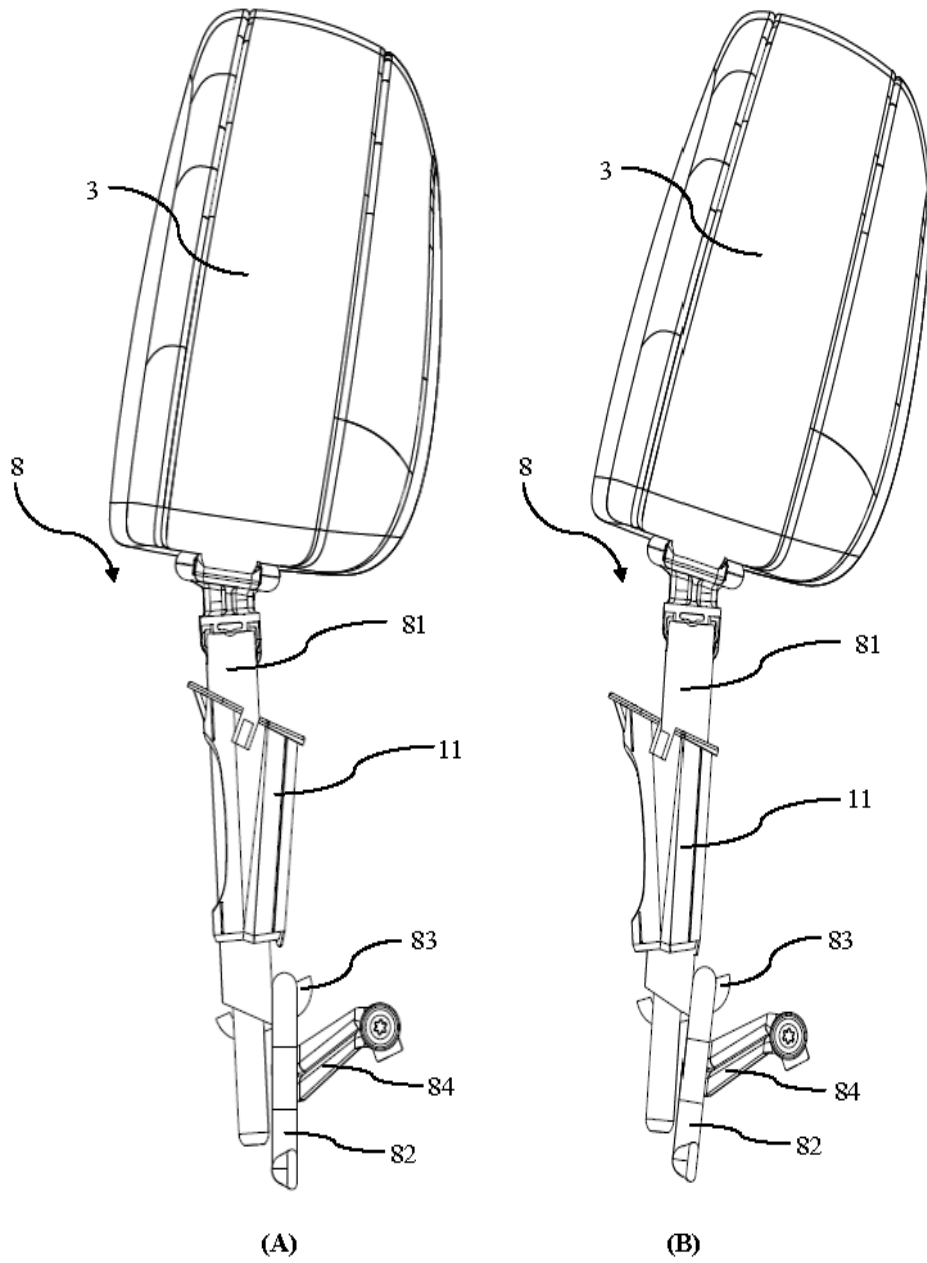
Right side view of the upper assembly before accident (A) and after accident (B)
